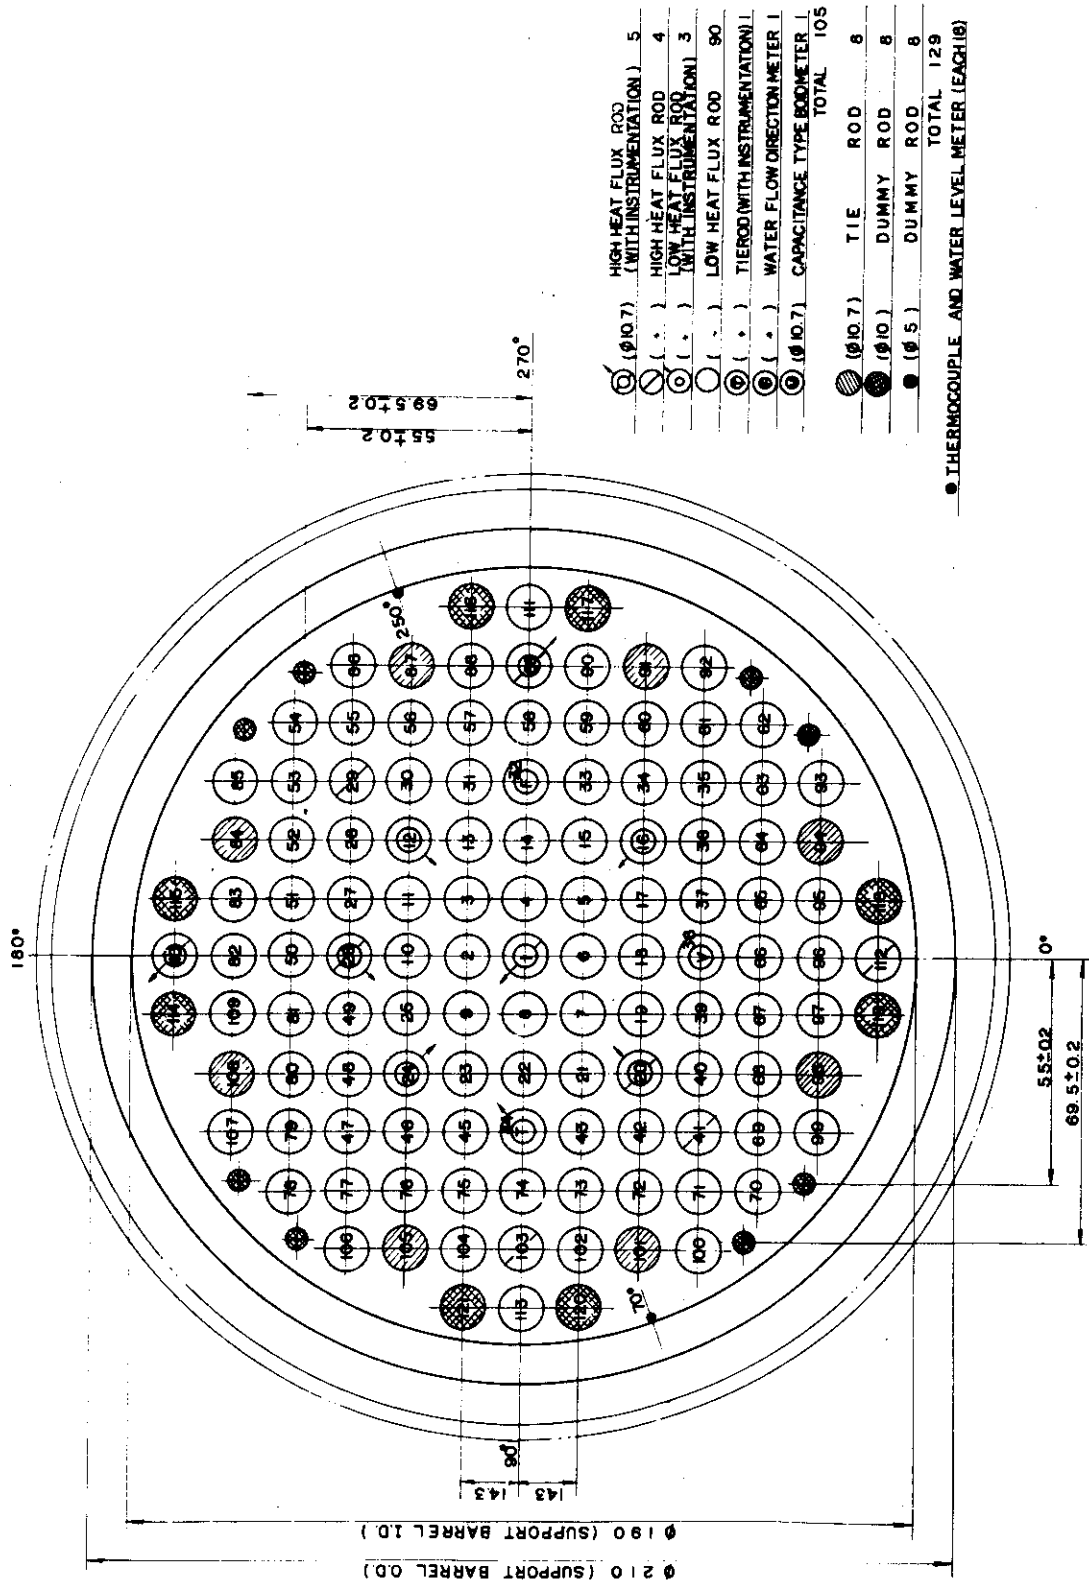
Arrangement of Simulated Fuel Rods in No.5 Assembly
